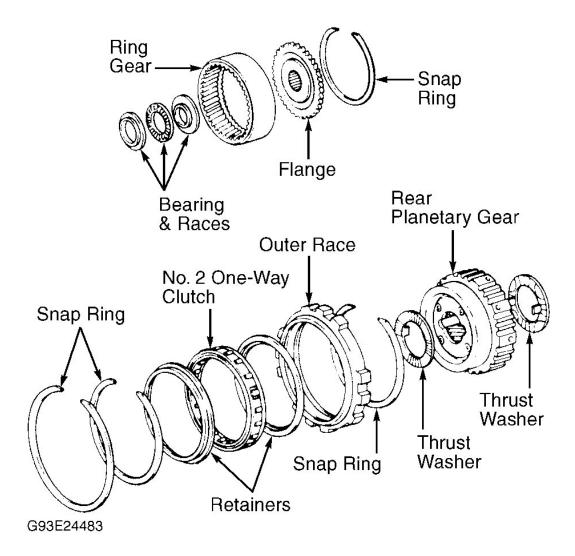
Exploded View Of Rear Planetary Gear Assembly Courtesy of TOYOTA MOTOR SALES, U.S.A. INC.
